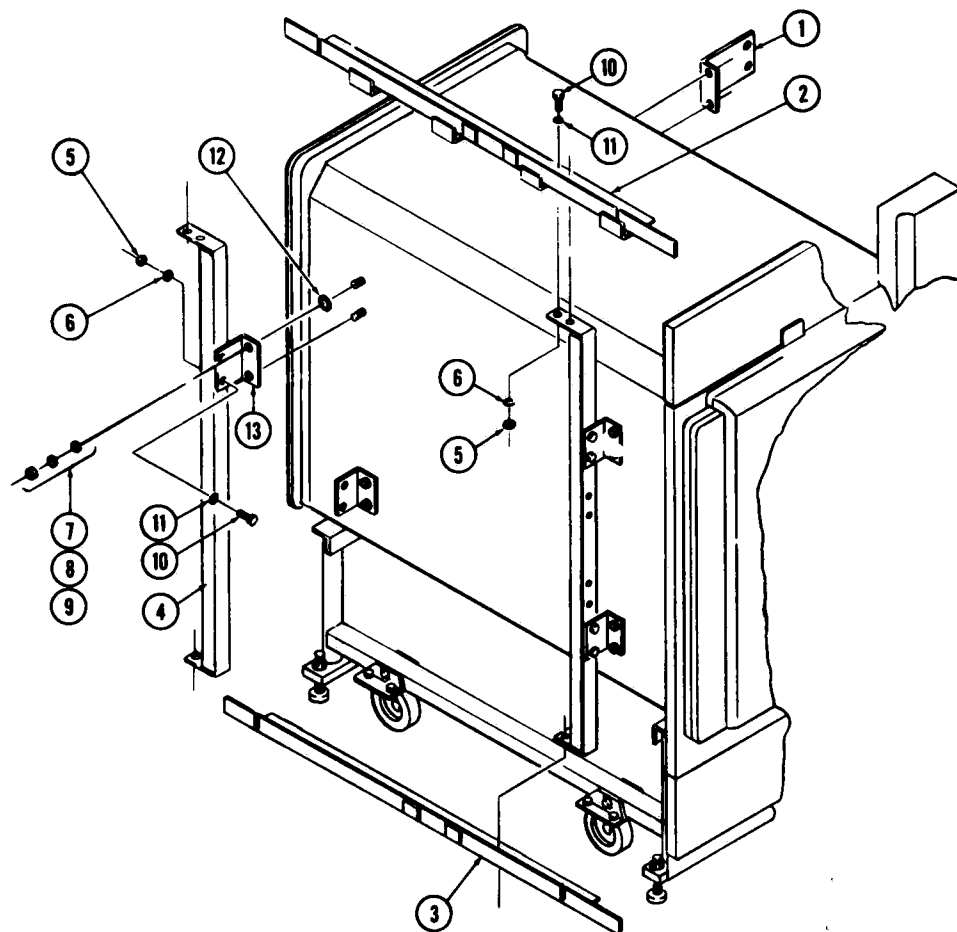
CABINET ASSEMBLY: Freestanding Sterilizer (Part 2 of 2).
